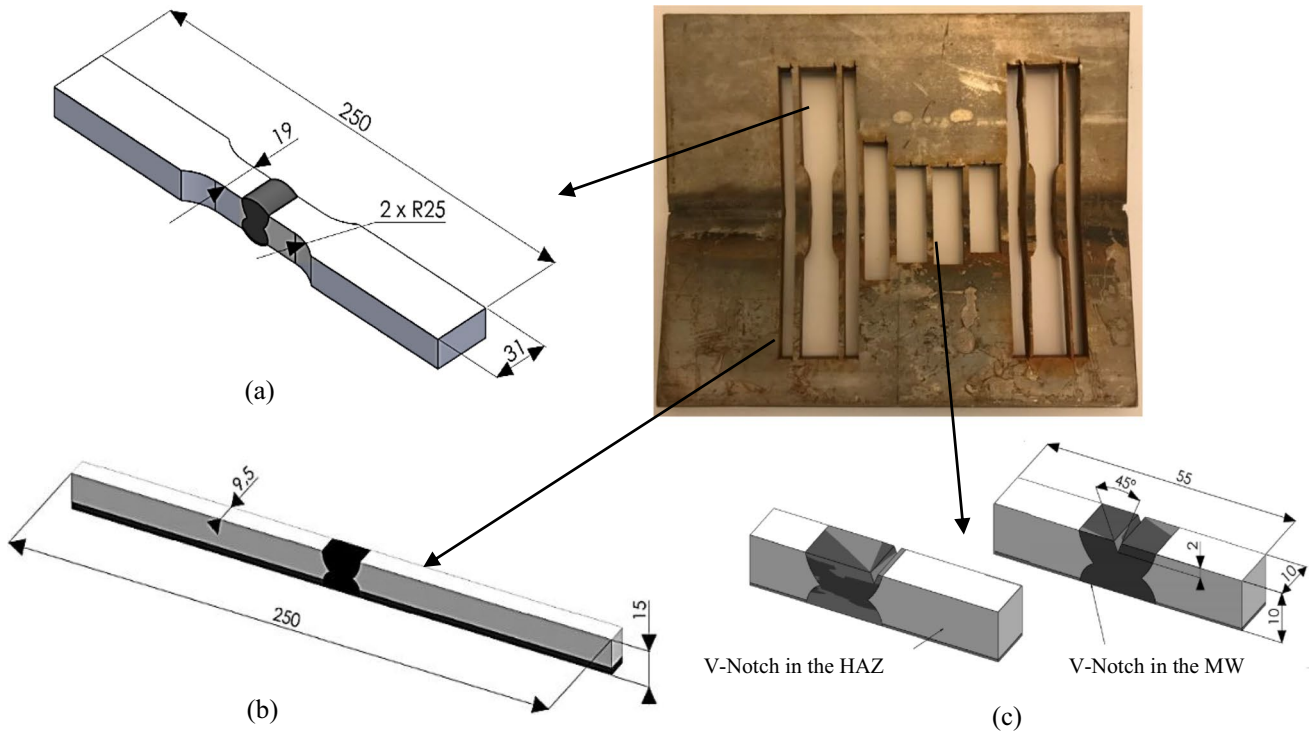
Form and dimensions (in mm) of specimens extracted from the welded plates. a Tensile test specimen. b Bend test specimen. c Impact test specimen
